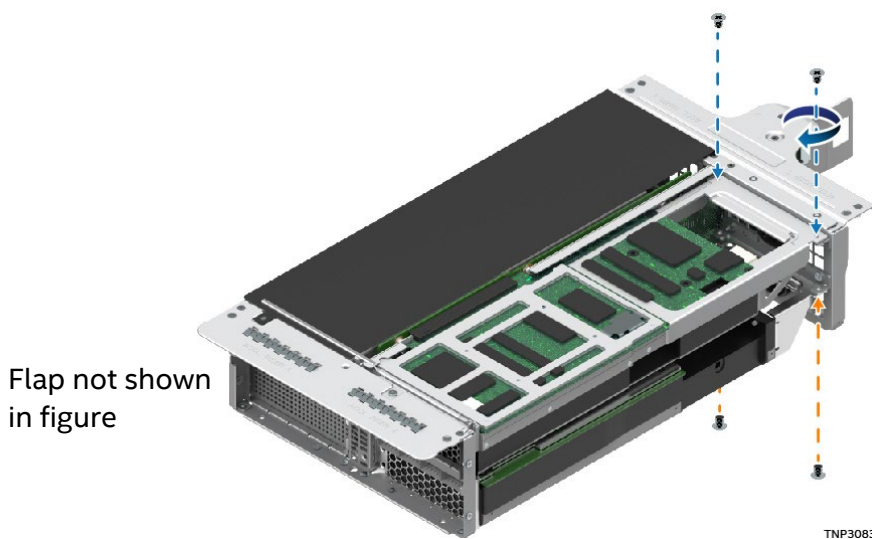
Securing the Accelerator Add-In Card in the Riser Assembly
